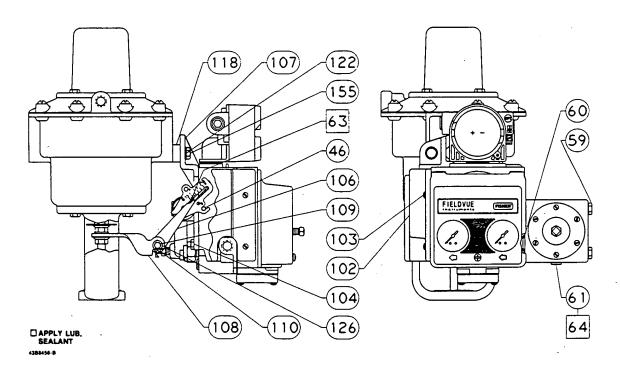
Type DVC5010 Series Digital Valve Controller Mounted on Type 513 Size 20 Actuator with Integrally Mounted Filter Regulator
